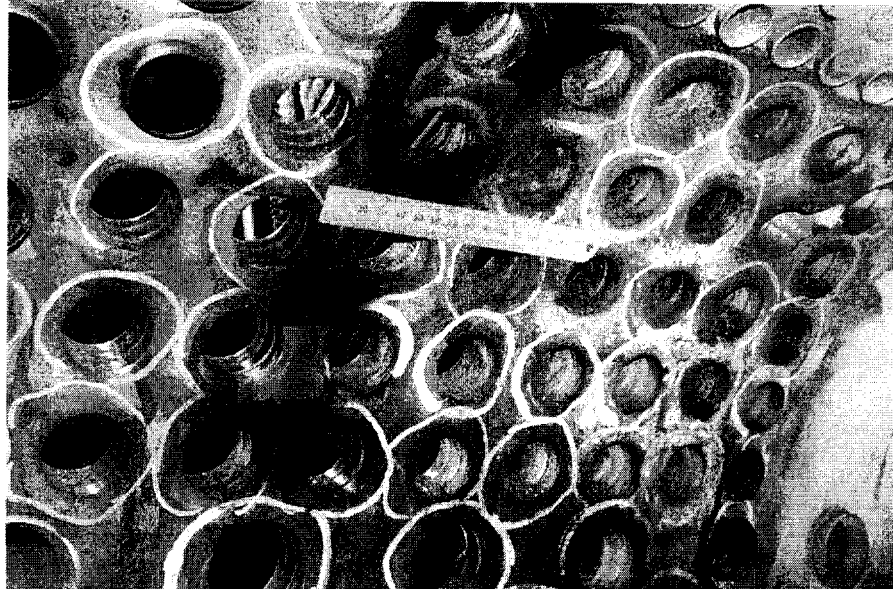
VIEW INSIDE AMS WATER DRUM SHOWING HEAT AFFECTED 'HALF-MOON ZONES,' G14 CRACK CUT OUT (TOP RIGHT) AND 'BELLING ON TUBES'
